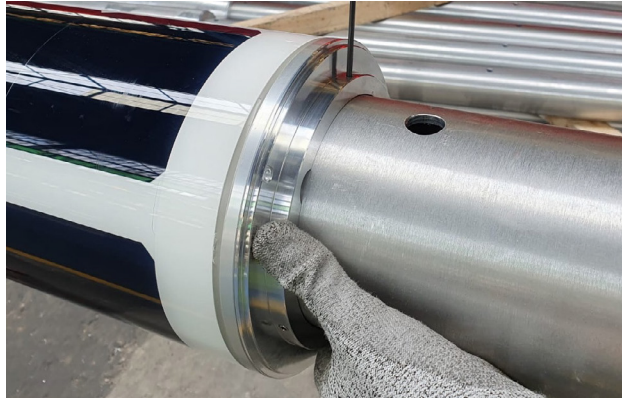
Installing Middle Adapter Ring Set Screws
